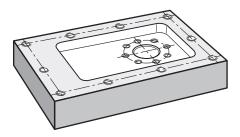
Example workpiece - drilling a bolt hole pattern and a row of holes
